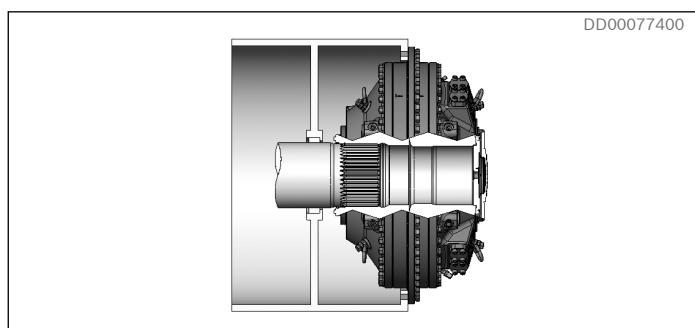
Flange mounted motor with splines and low radial load from driven shaft.
